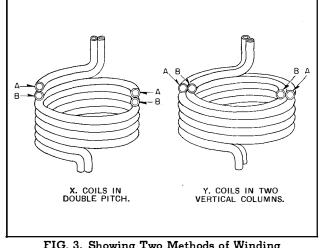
Showing Two Methods of Winding Cooling Coils.
